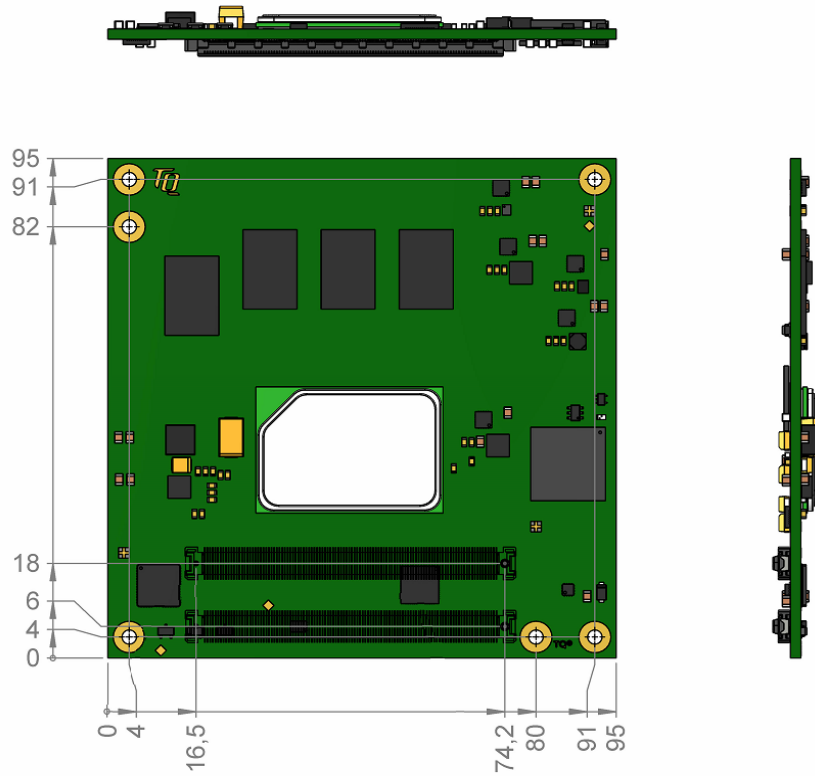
Three-sided drawing of the TQMxE40C1 (dimensions in mm)
